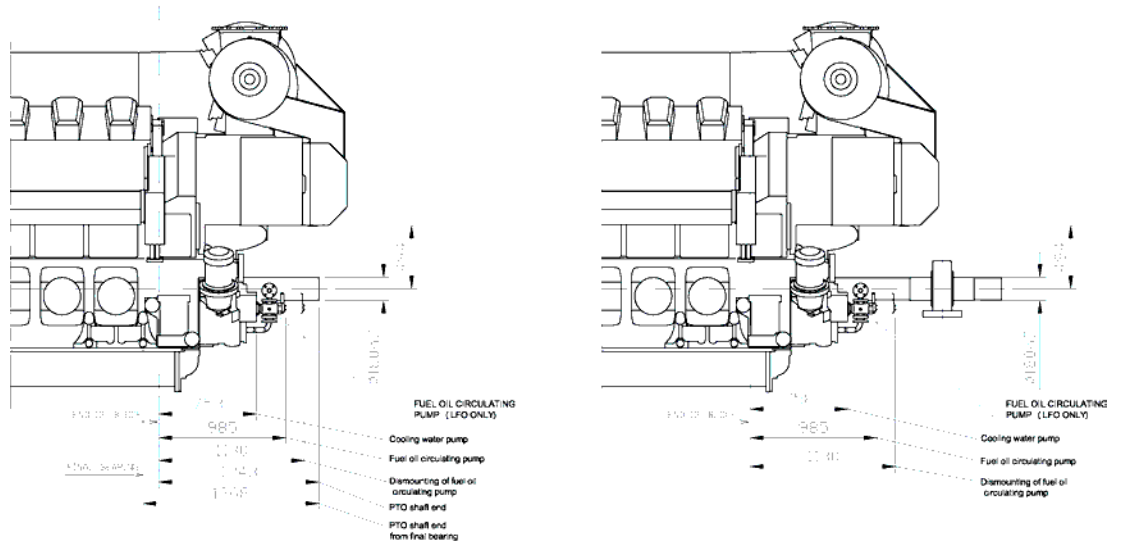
PTO-shaft arrangement of standard PTO shaft and with external support bearing for V engines
